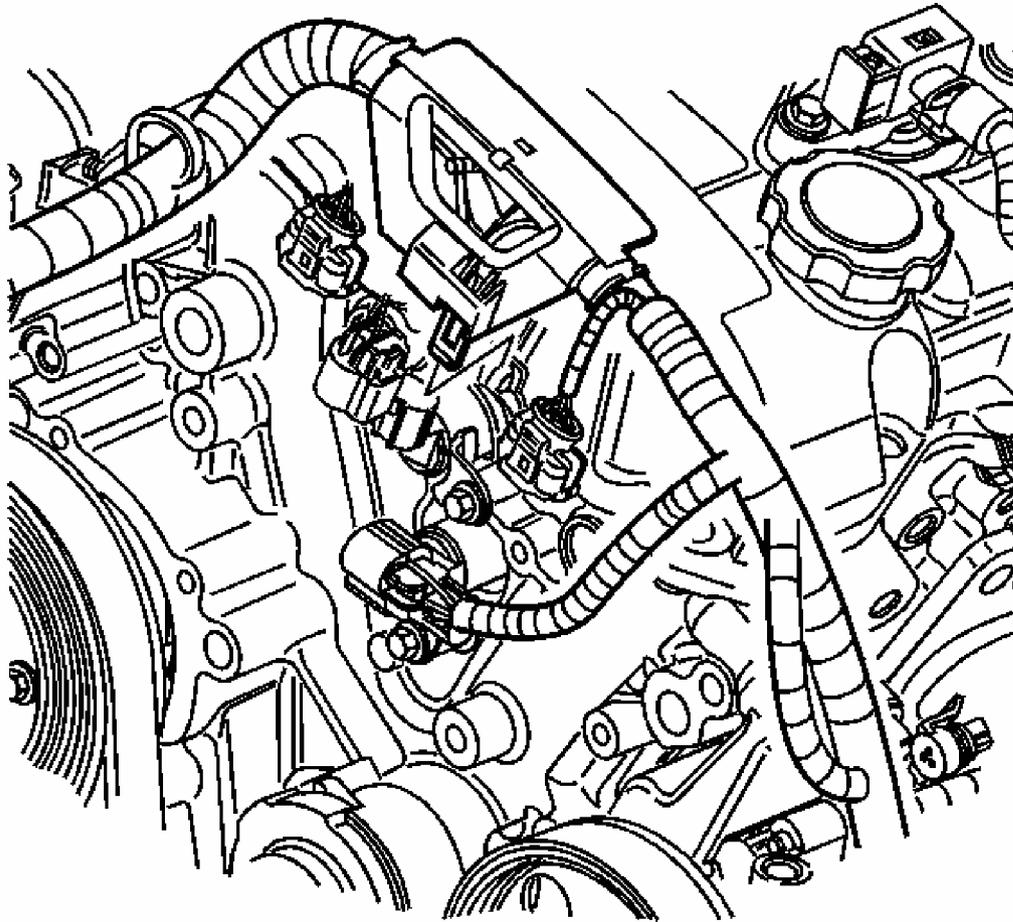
View Of Left Camshaft Position Actuator Valve Electrical Connectors
